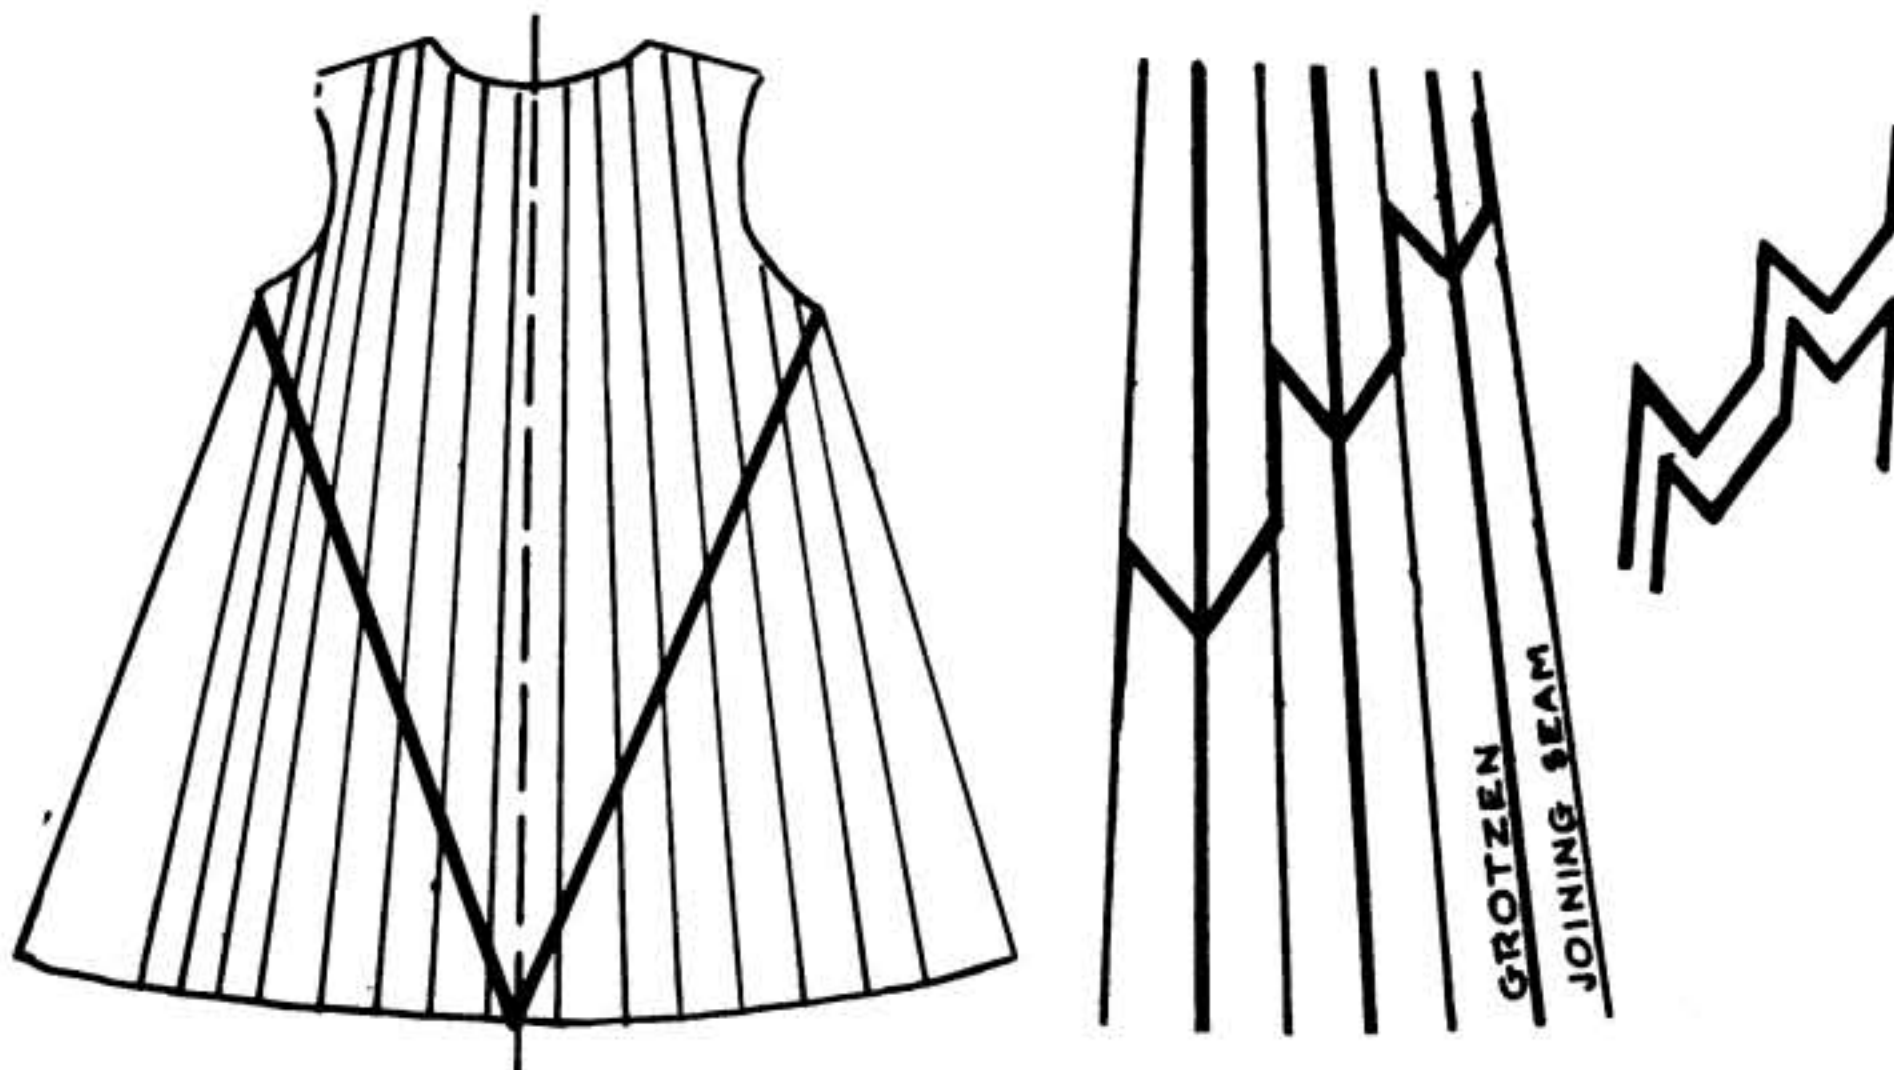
Left: Method of drawing guide line for step-triangulation. Center: Detail of method of drawing. Right: Section of steps cut apart.
